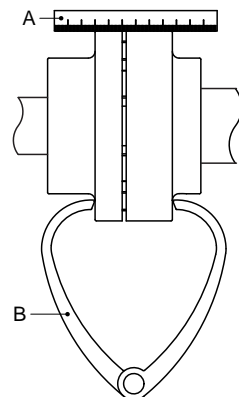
Aligning the coupling by means of a ruler and a pair of outside calipers.
